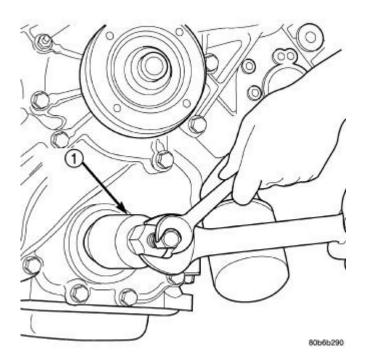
Crankshaft Front Seal Removal Courtesy of CHRYSLER LLC
